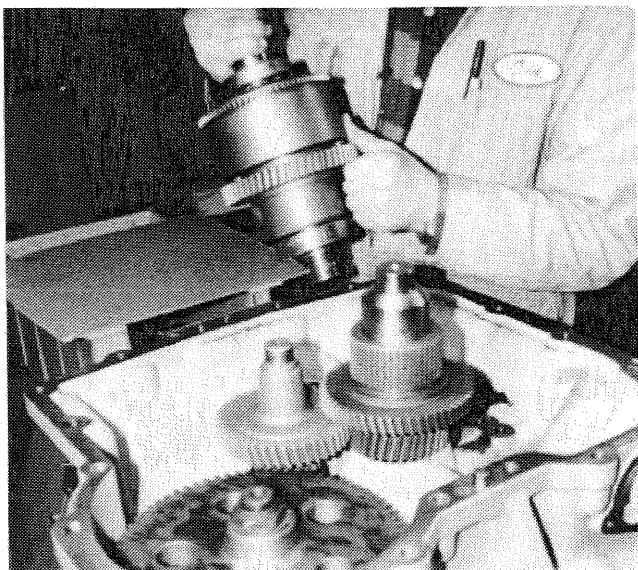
Disassembly of the Front Cover (3 of 3)
